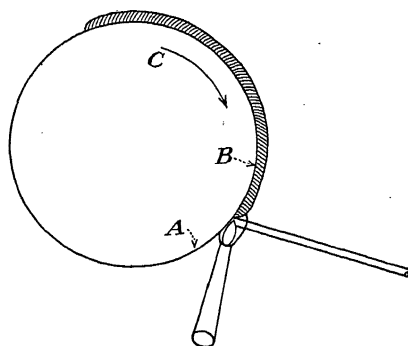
Overhead pipe weld, Lindeweld process. A, preheated area; B, weld; C, direction of welding.
